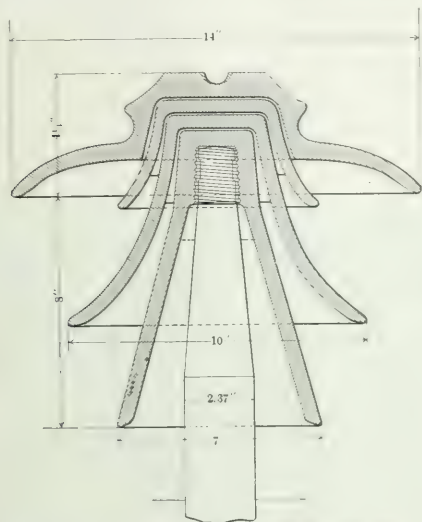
CROSS-SECTIONAL ELEVATION OF INSULATOR.
